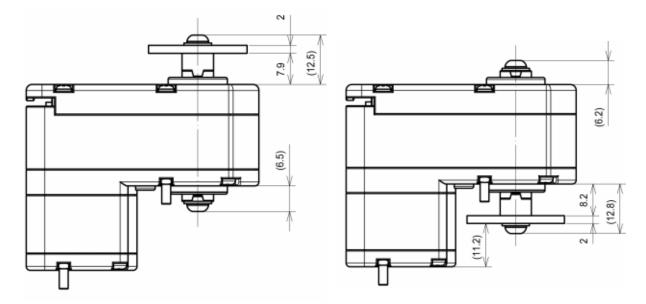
Dimensions of RS601CR and Servo Horn
